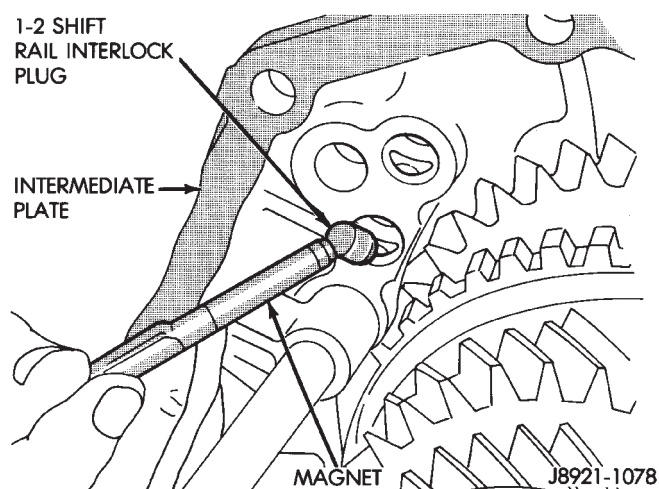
Removing 1-2 Shift Rail Interlock Plug
